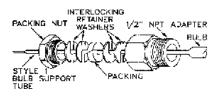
Part No. FTG13A-600R packing nut assembly. (Used with swaged bulb with support tube for direct immersion application.)
